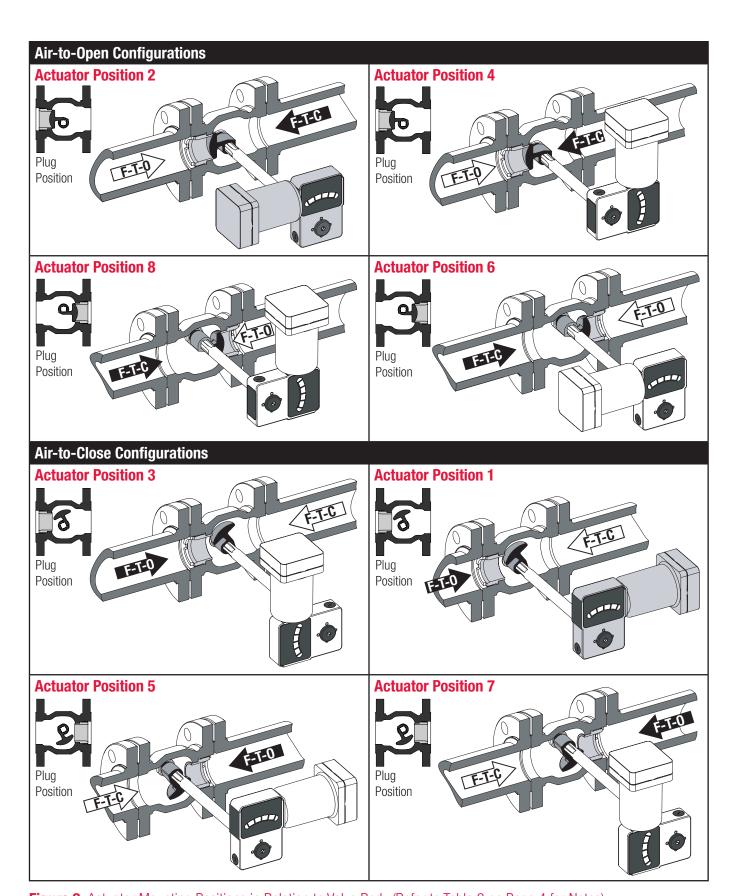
Actuator Mounting Positions in Relation to Valve Body (Refer to Table 3 on Page 4 for Notes)
